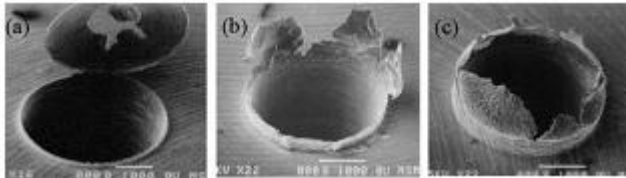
Burr categories a) uniform burr, b) transient burr, and c) crown burr [39].
